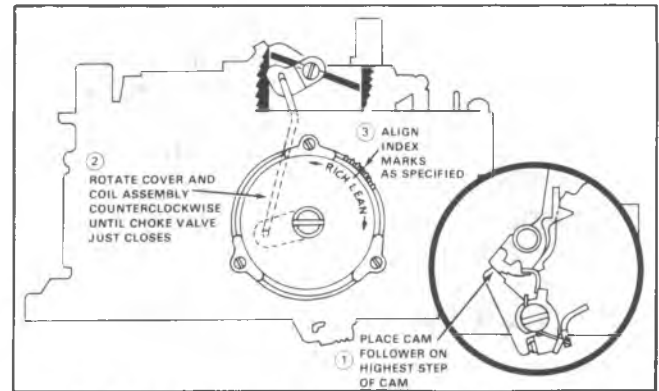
Automatic Choke Coil Adjustment - Hot Air
